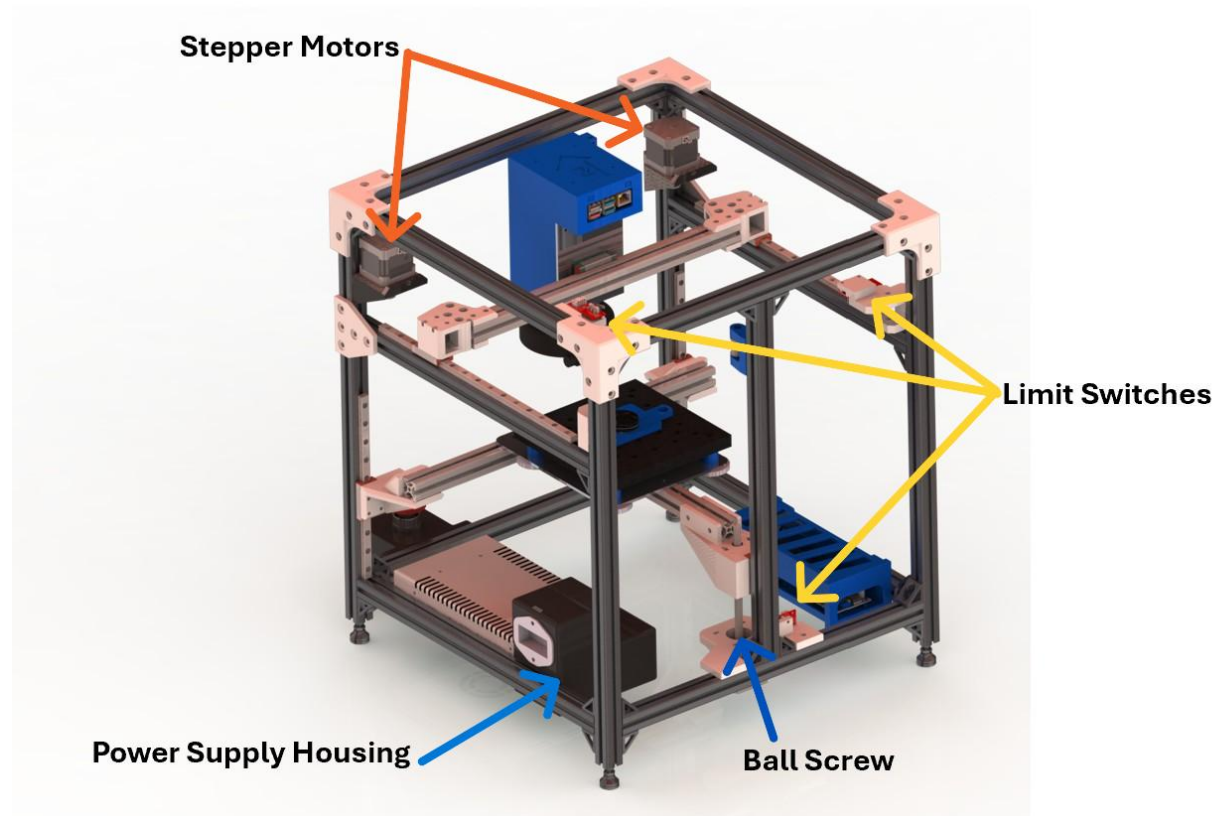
and Figure 25 show the CAD renderings of the system's structural assembly, with key components clearly labeled for user reference. The frame consists of aluminum extrusions that support all functional modules of the system, ensuring rigidity and alignment during operation.
